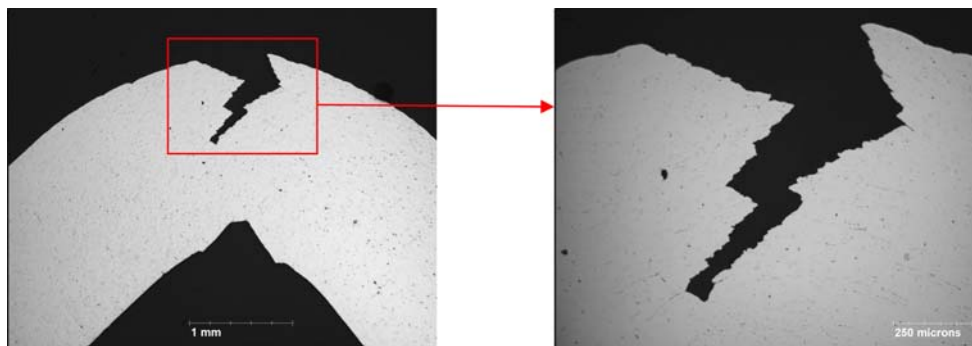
Damage in a continuous cast AA5754 sample deformed to failure in the V-bending fixture. There are no voids away from the fracture surface and the crack moves from stringer to stringer at this resolution
